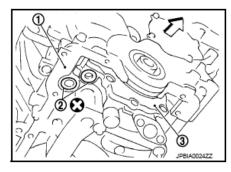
Identifying Cylinder Block And Oil Pump O-Rings Courtesy of NISSAN NORTH AMERICA, INC.
